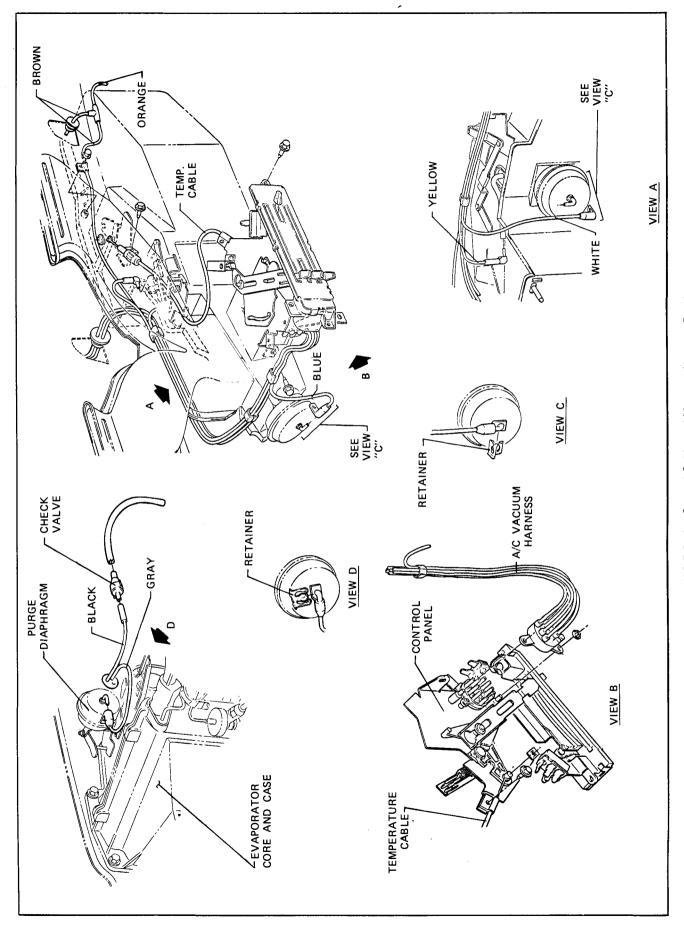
A-126 F Series Control Cable and Vacuum Harness Routing
